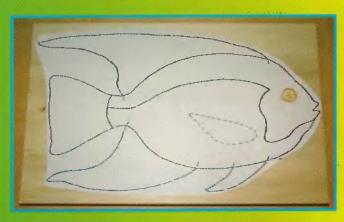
After drilling a test hole In scrap wood, drill the hole to accept the glass eye.
